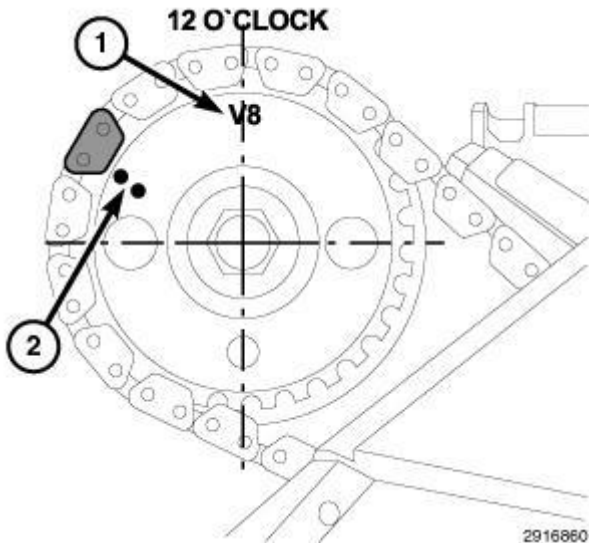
Aligning Camshaft Sprocket V8 Mark & Identifying 2 Dots
